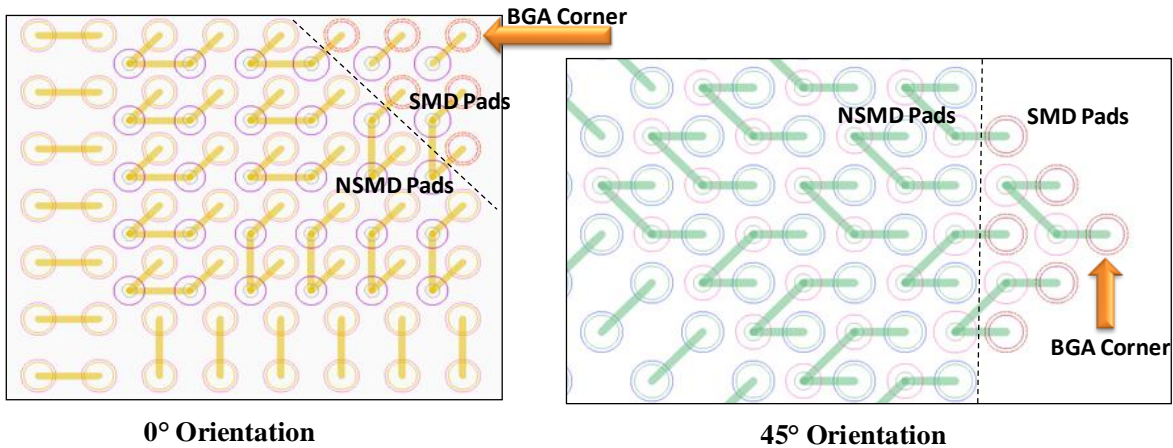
PCB Pad Layout with SMD Pads at Package Corners
